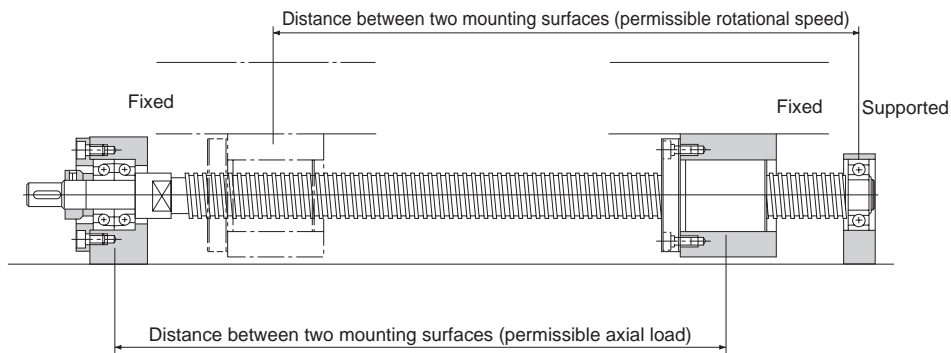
Screw Shaft Mounting Method: Fixed - Supported
